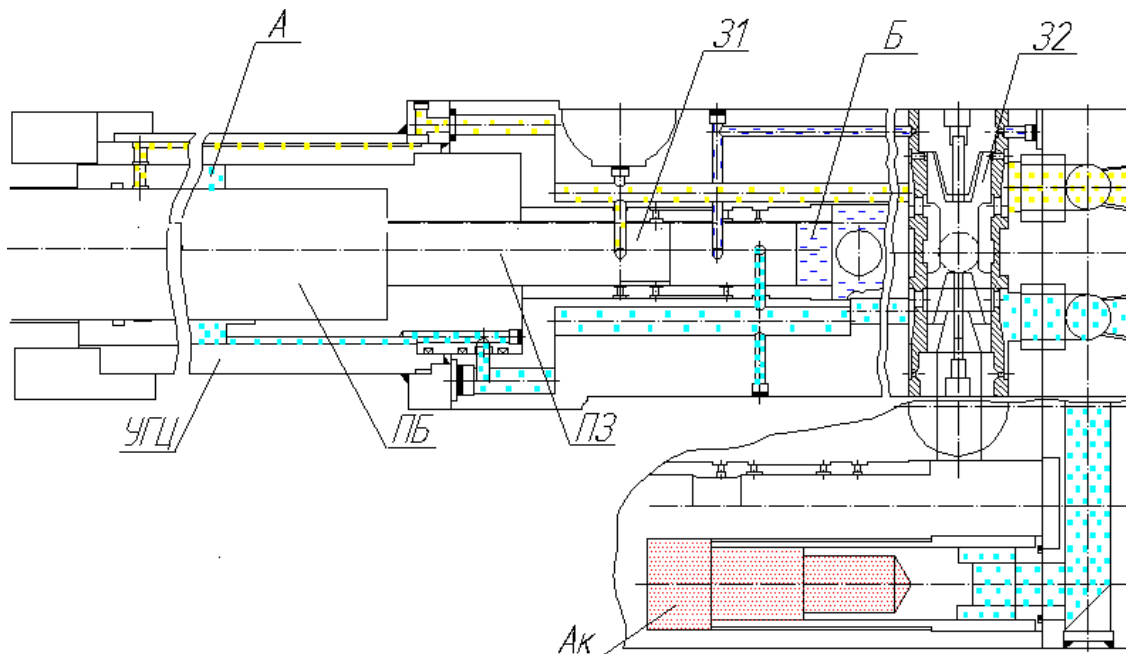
Scheme of hydraulic control system of hydraulic hammer MGP-1
